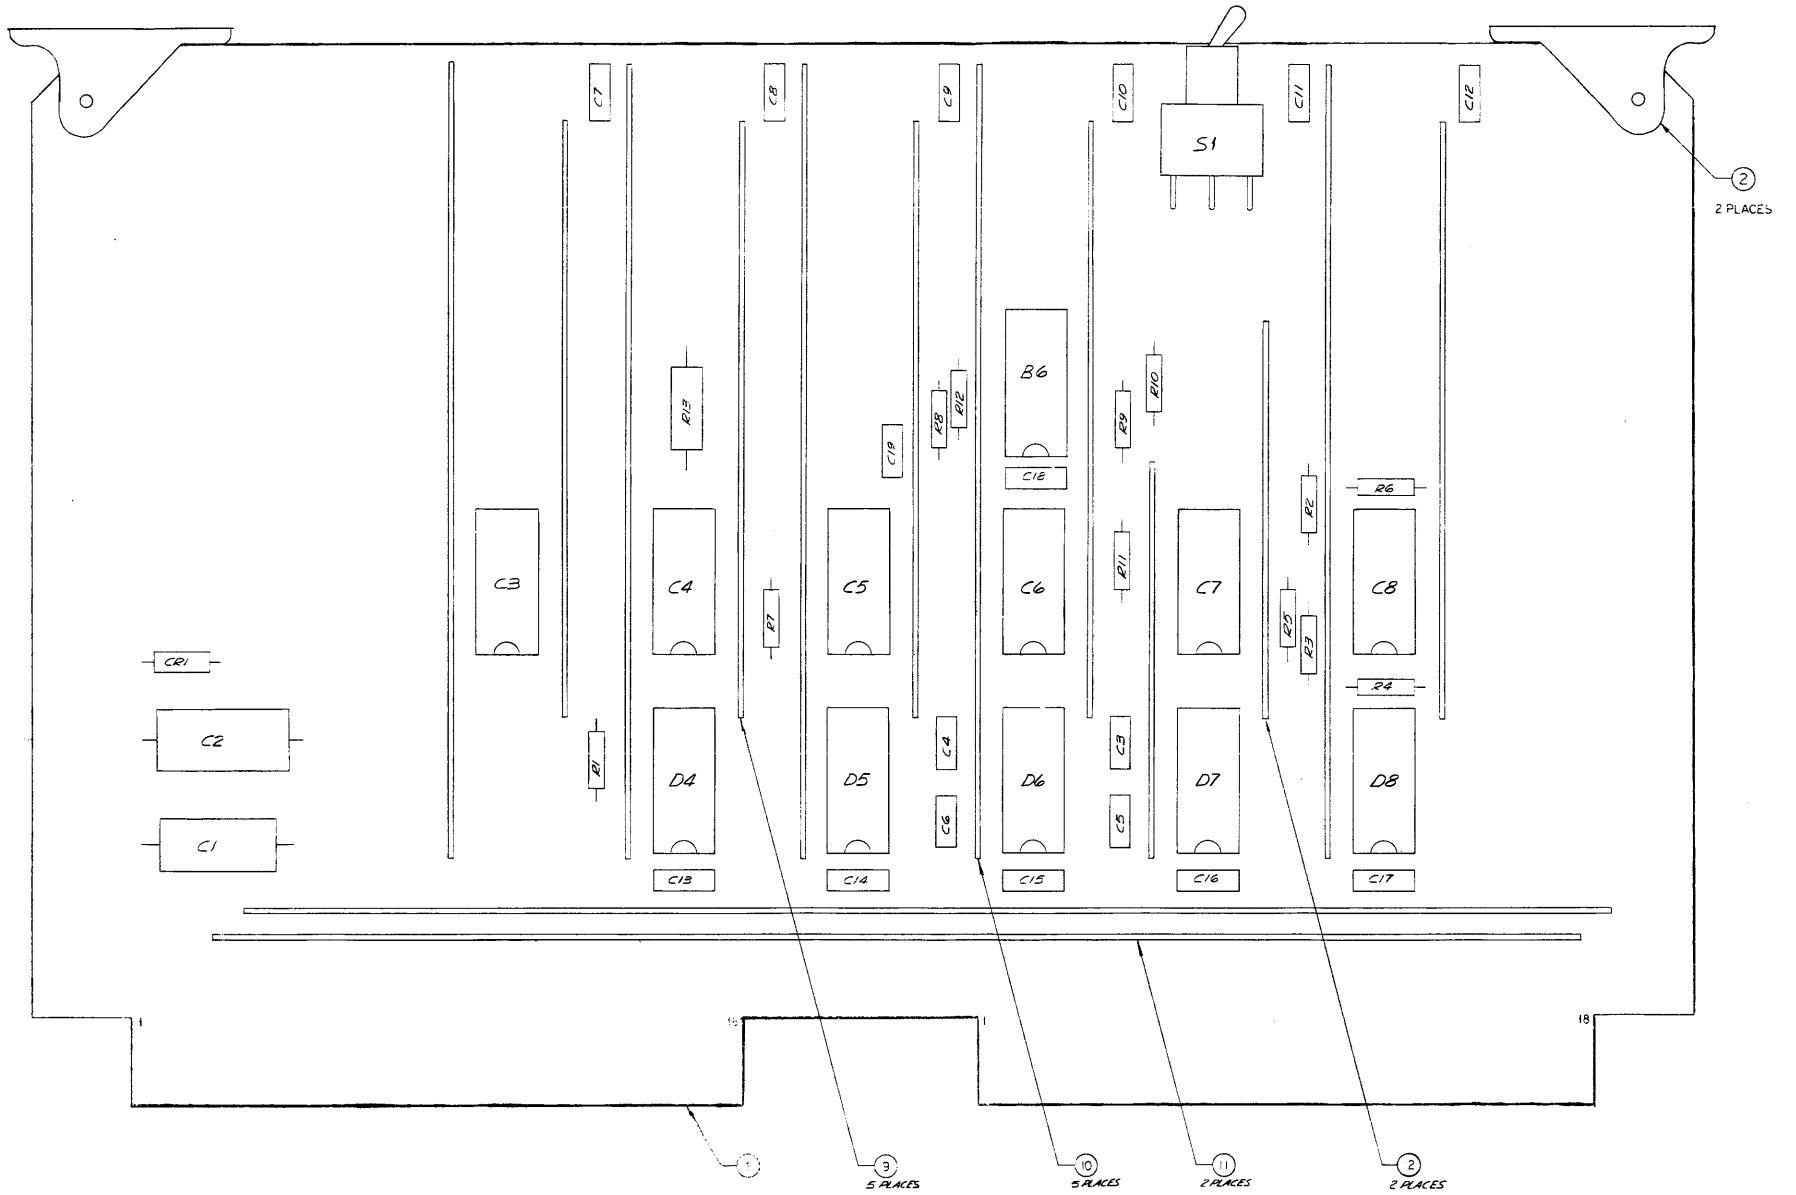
Assembly Diagram, Receiver Card (Model 2893A)
